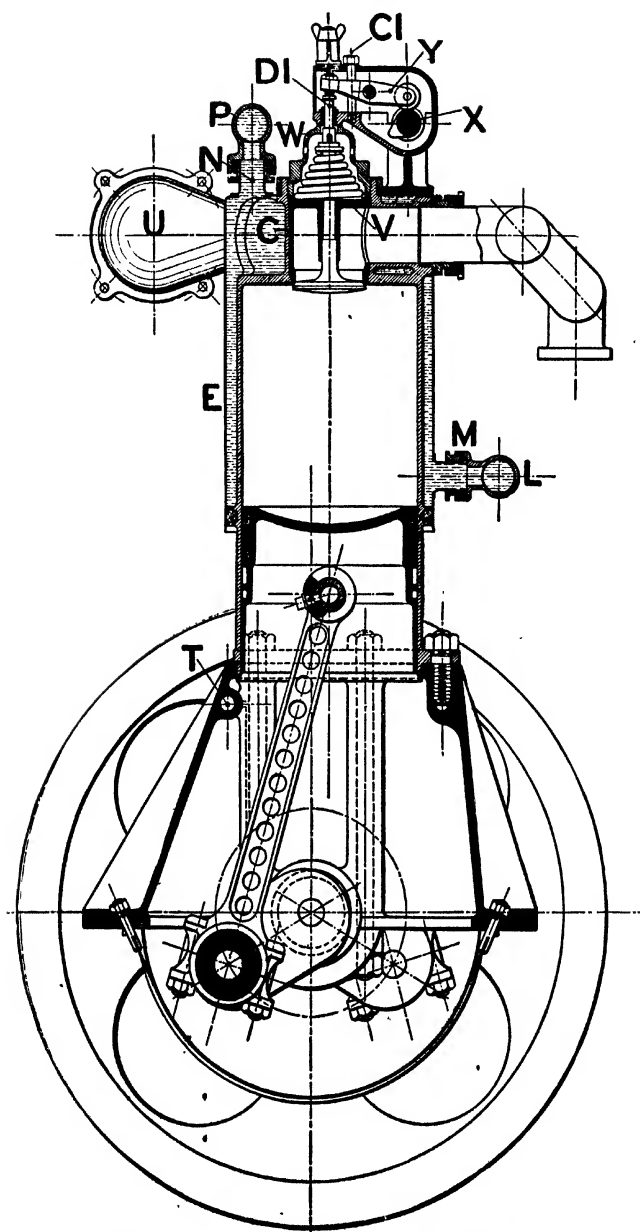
Transverse section of six-cylinder 120 H.P. Green engine.
